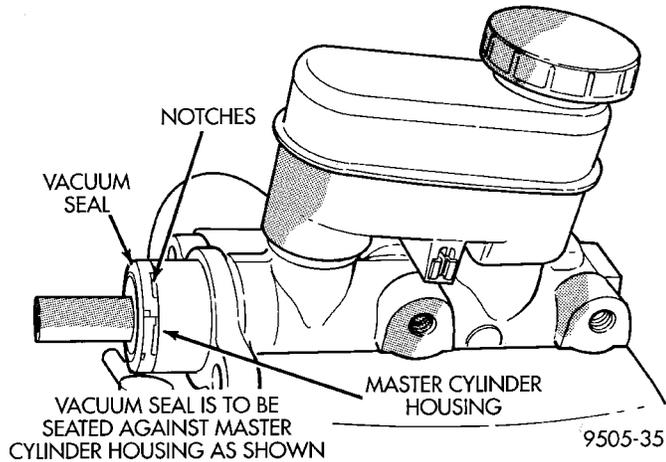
Vacuum Seal Positioned For Installing Master Cylinder
